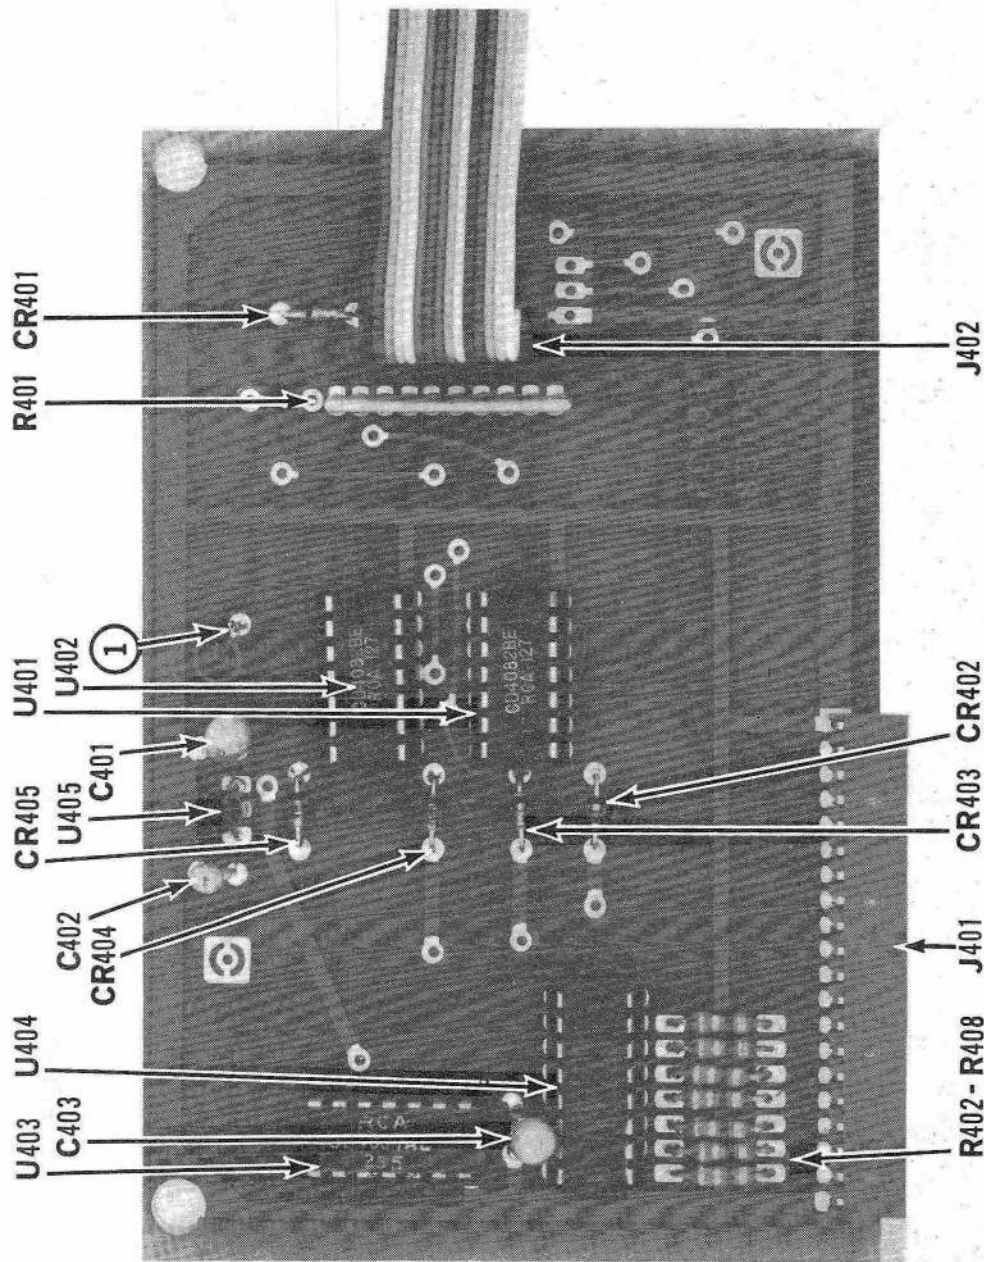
PHOTOGRAPH, PC401, SHOWING COMPONENT LOCATIONS
